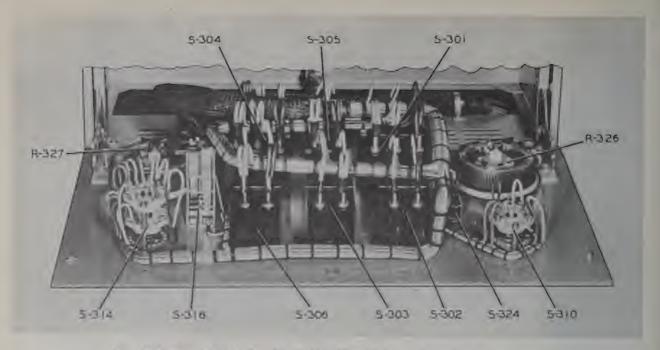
Power Supply Assembly PP-1088/FRT-26, Lower Control Panel, Rear View.
